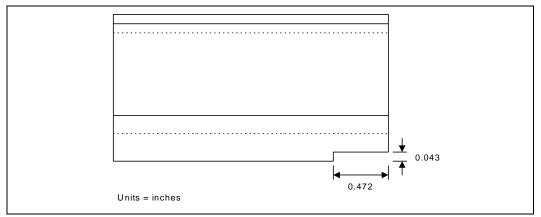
Dimensions of Mechanical Step Feature in Heatsink Base for the FC-PGA Package
